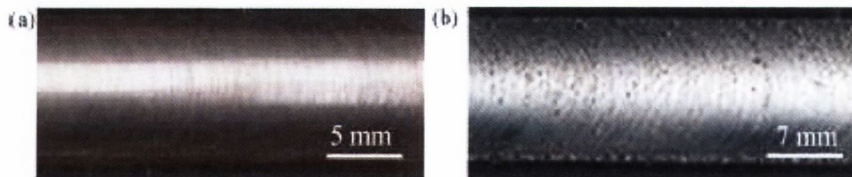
Surface Finish (a) Concave Shoulder and (b) Scroll Shoulder [28]
